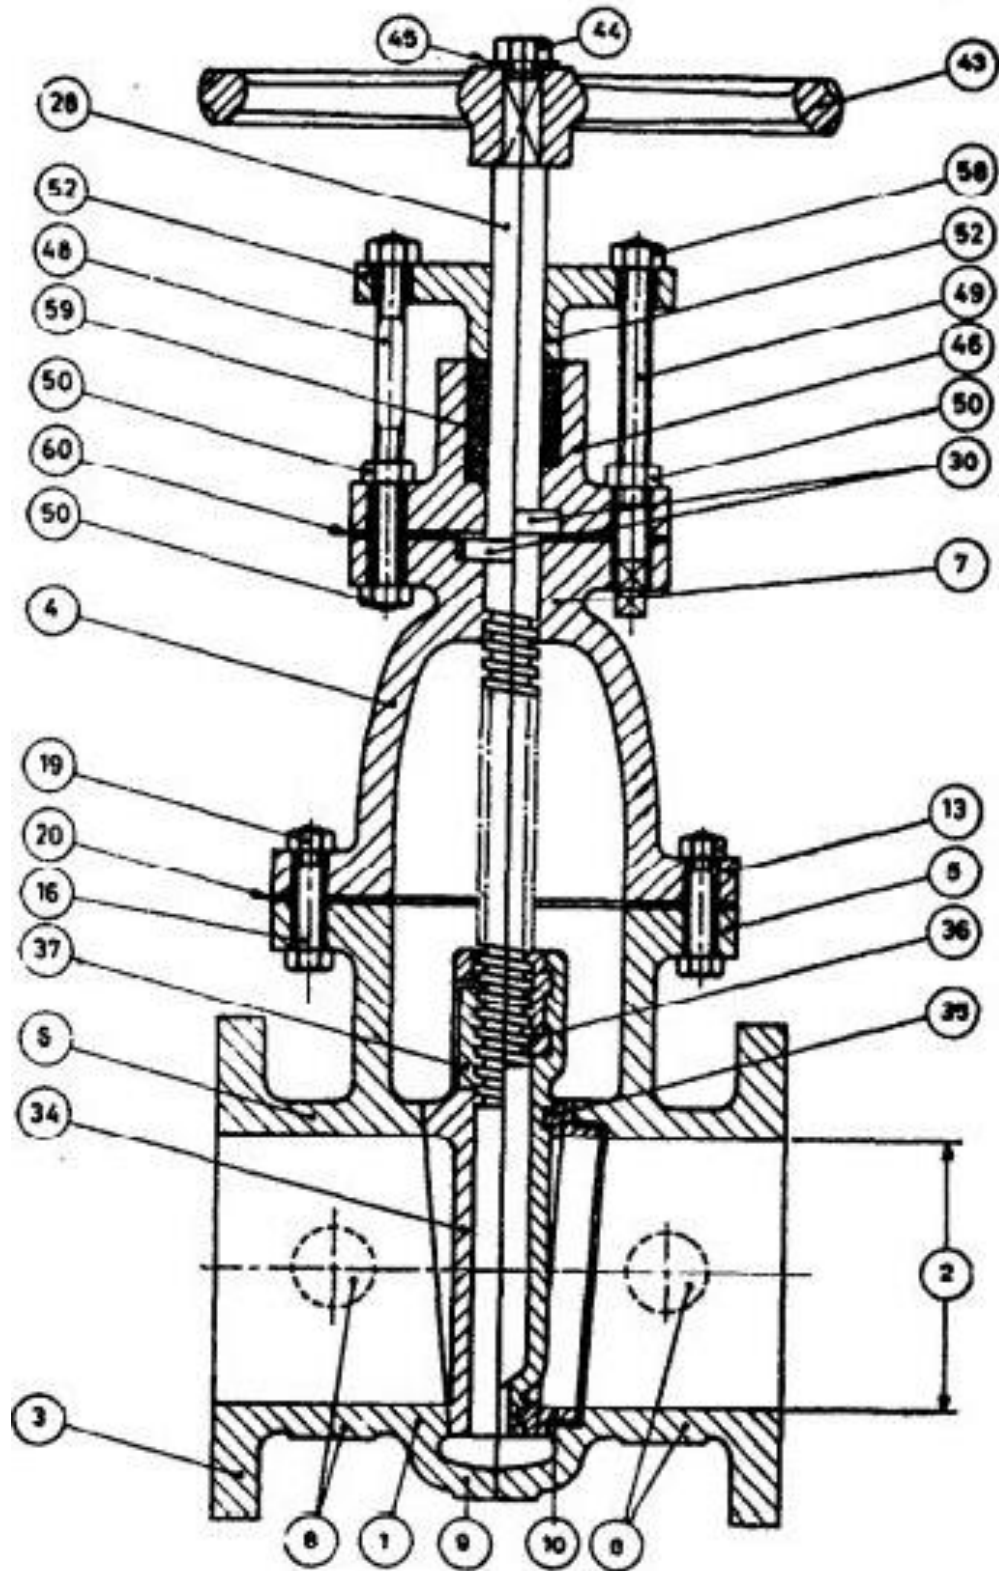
INSIDE SCREW, SOLID WEDGE, NON-RISING STEM
